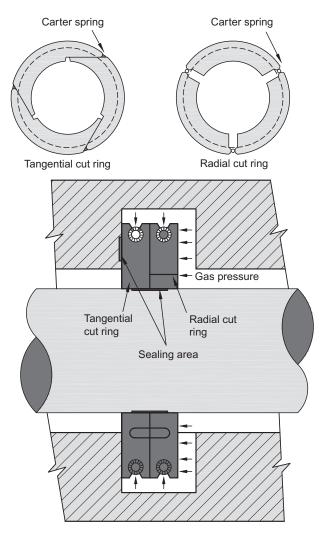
Sectional view of the packing arrangement. Courtesy of Dresser-Rand.
